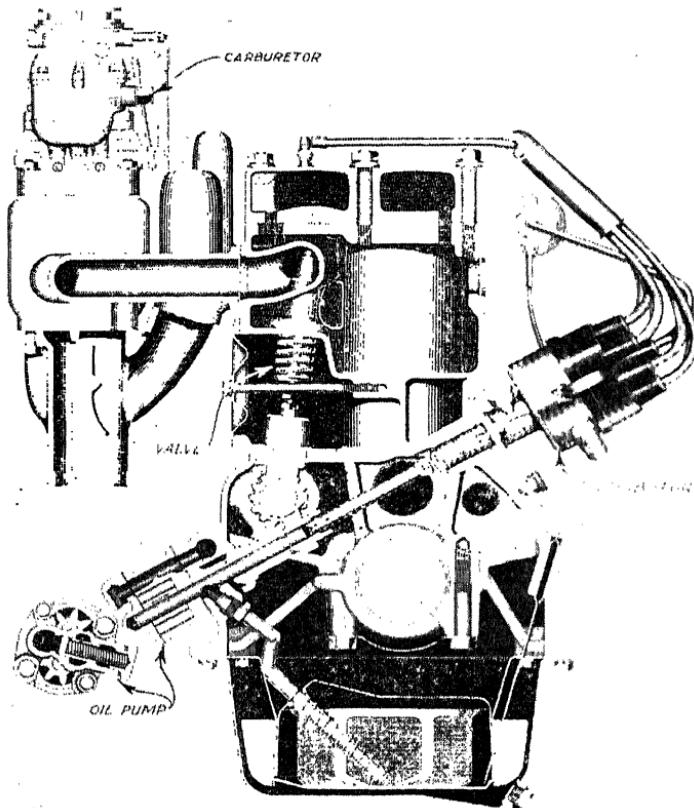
Front Cross-Sectional View of Packard 120 Engine
